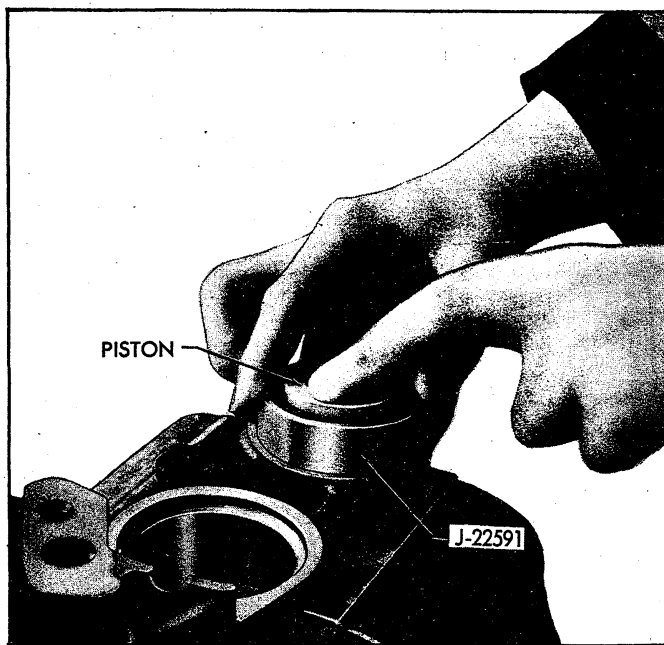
Installing Piston in Caliper Bore Using Tool J-22591
